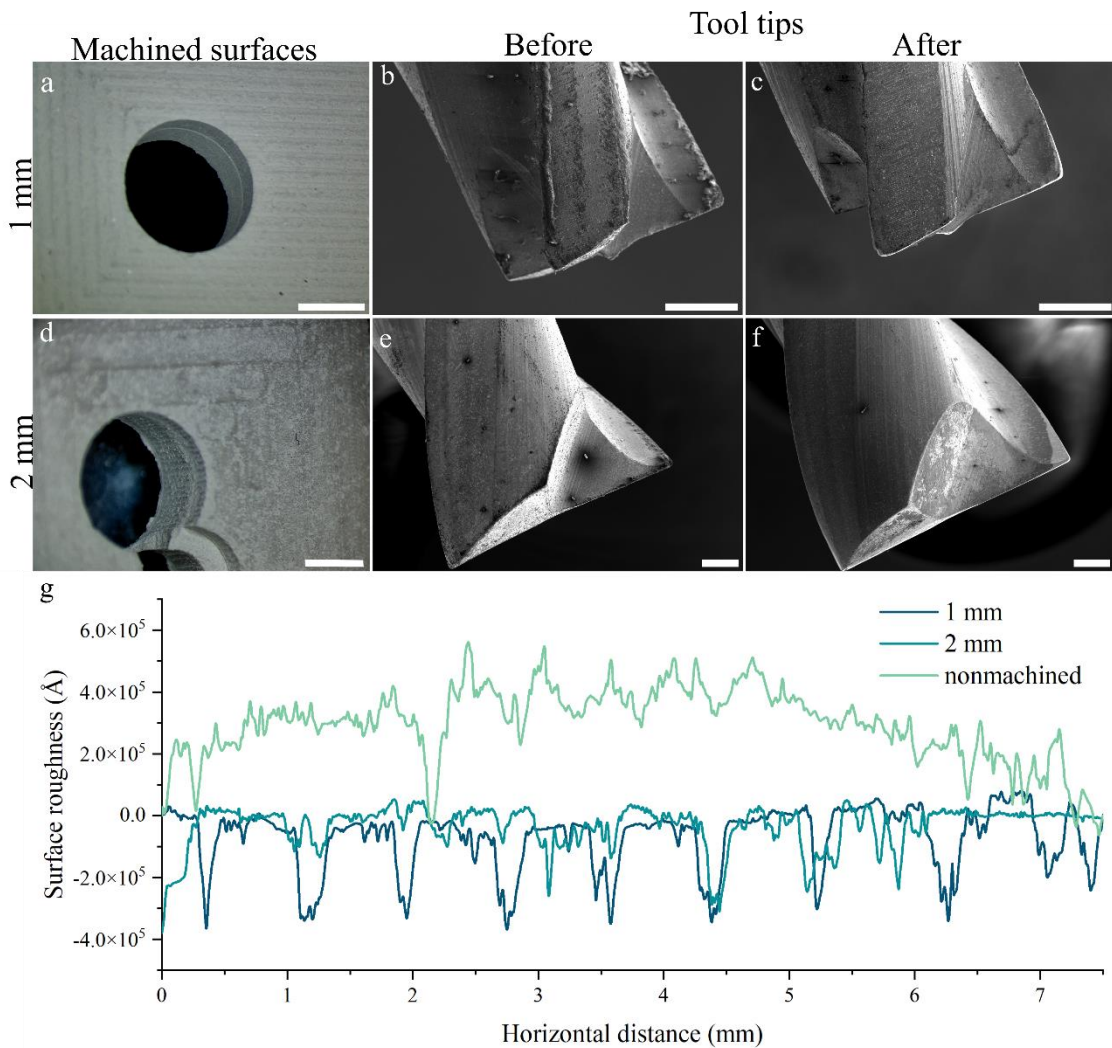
Upper row: a) A close-up of a hole machined using a 1 mm flat end tool, b) SEM micrographs of the surfaces of the 1 mm tool before use, c) 1 mm tool after use, middle row: d) a close-up of a hole machined using a 2 mm flat end tool, e) SEM micrographs of the surfaces of the 2 mm tool before use, and f) after use, lower row: g) surface roughness of the machined SiAlON surfaces with different tool diameters and nonmachined surfaces, scale bars on the optical images and SEM micrographs represent 2 mm and 250 μm , respectively.
